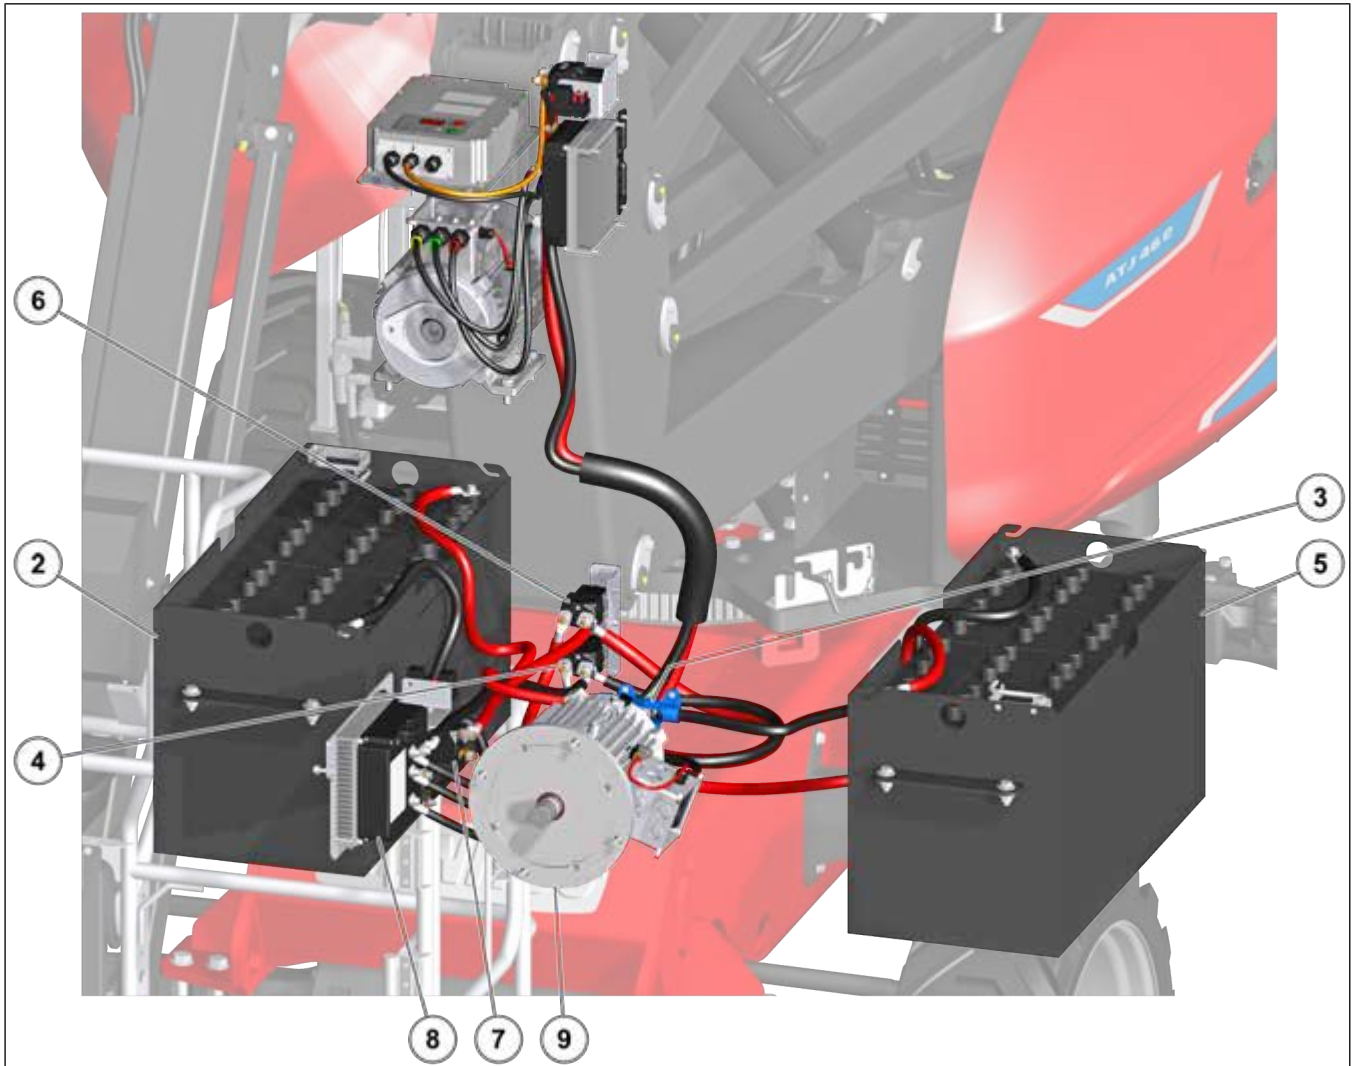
Checking cables and high-voltage electrical connections 2 - from machine no. MAN00000J01101634
